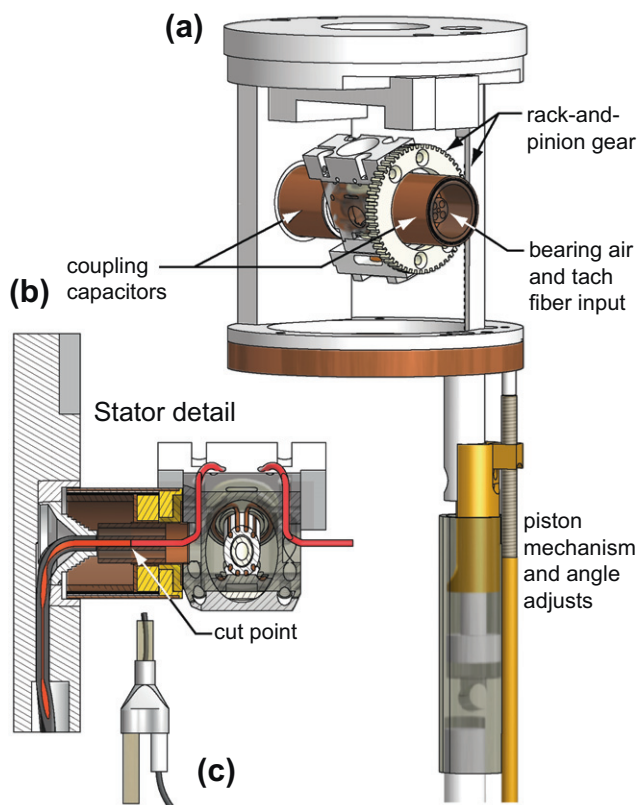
(a) Overview of the pneumatic SAS probe with the outer can and RF channels removed for clarity, showing the stator and the positioning and actuating mechanisms for the steam engine design. (b) Stator detail showing the fiber optic path. Each fiber has a stationary and a moving part. The moving part of the fiber is stripped of clad and passes through a hole in the side wall of the spinner. Outside, it bends towards the rotor cap, which is 0.085" in diameter. With the 60° angle between the cables, this means that the fiber holes bypass the center by 0.015". (c) Y-shaped connectors allow for placing fibers in the drive and bearing air lines without causing air leakage.
